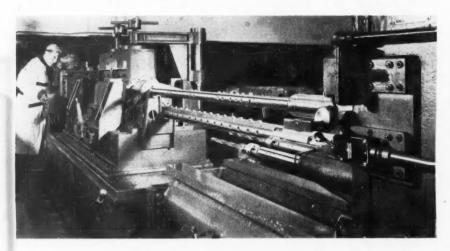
Cam and Crank Bearing Holes are Finish-Bored with This Special Natco Two-Way Boring Machine, Equipped with Davis Bars
